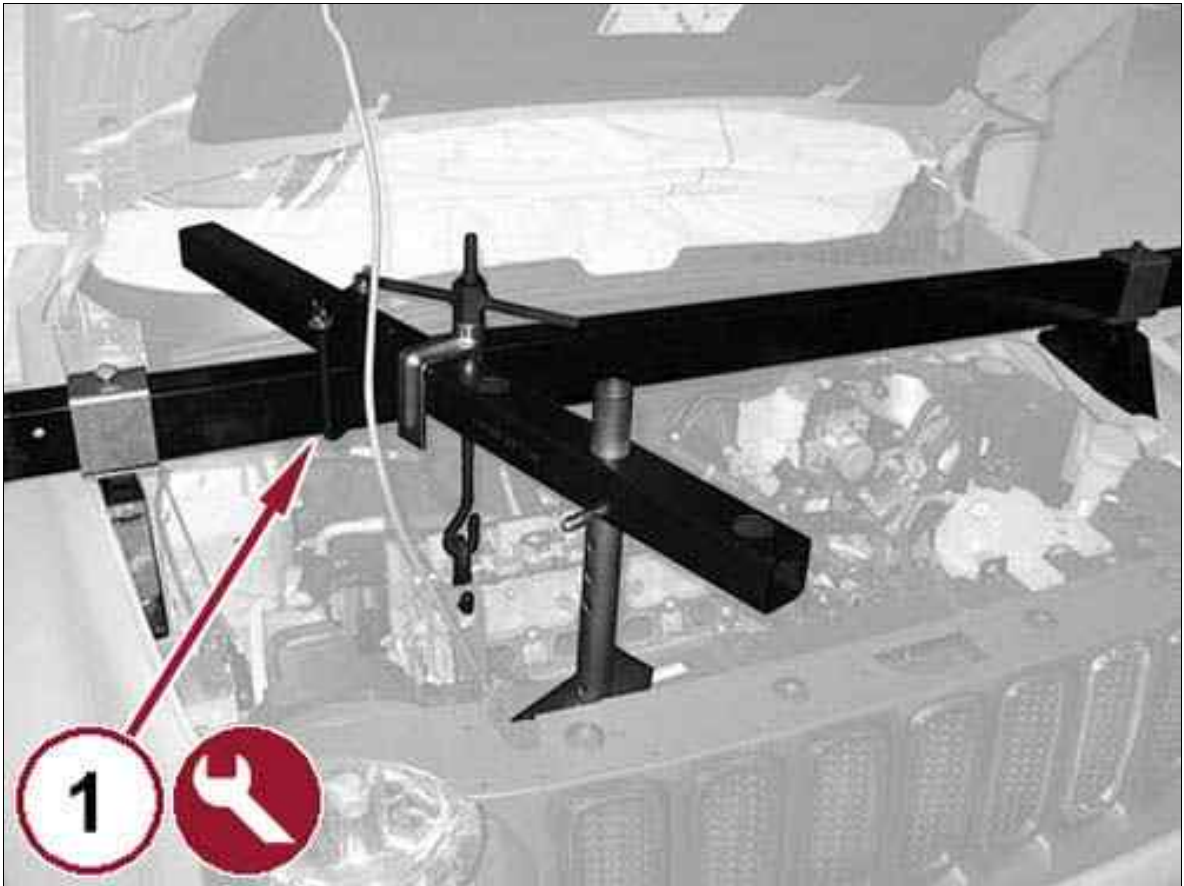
Engine Support Tool Bracket At Upper Alternator Mounting Hole
